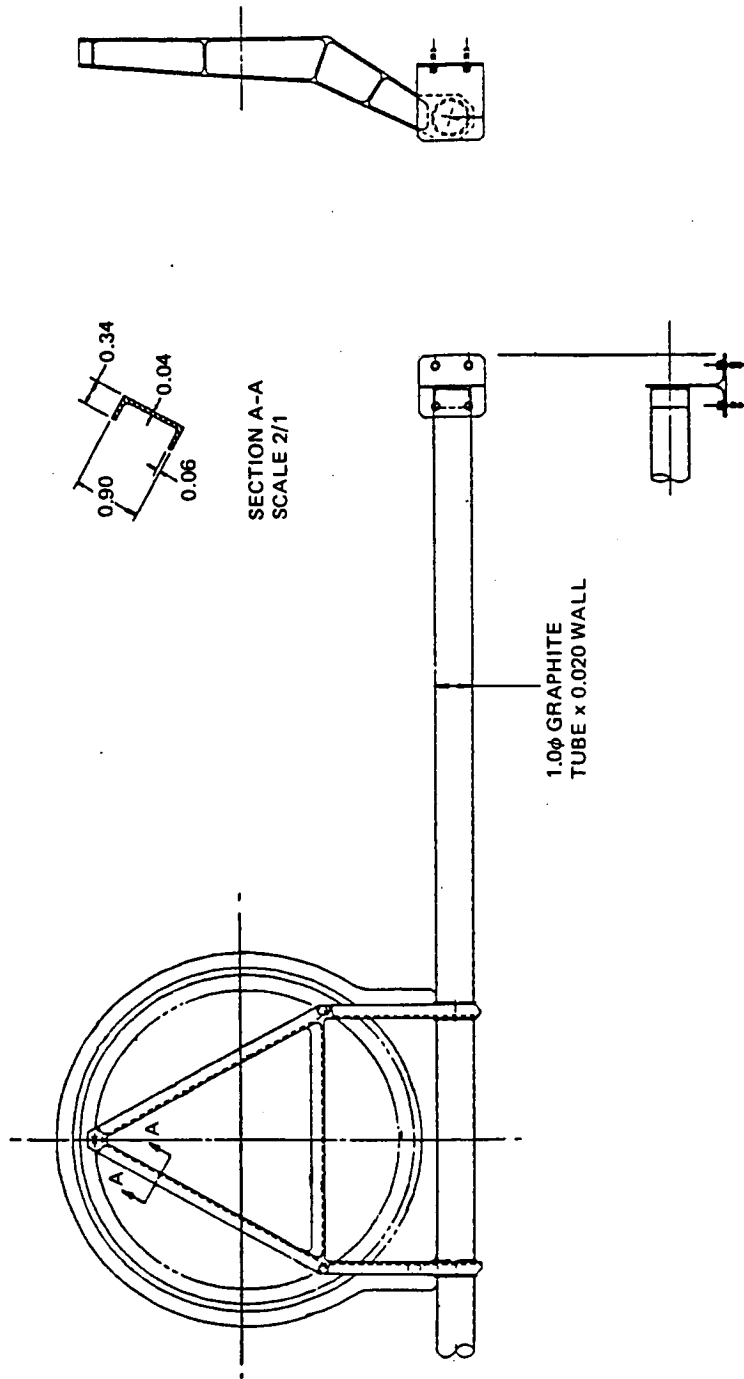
Mast Tip Fitting Connecting Lid Structure to Outboard End of Mast
